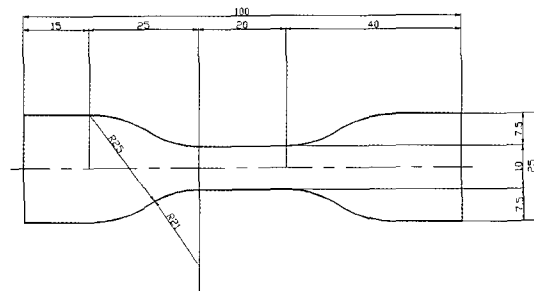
Dimensions of specimen used for test (Unit : mm).
